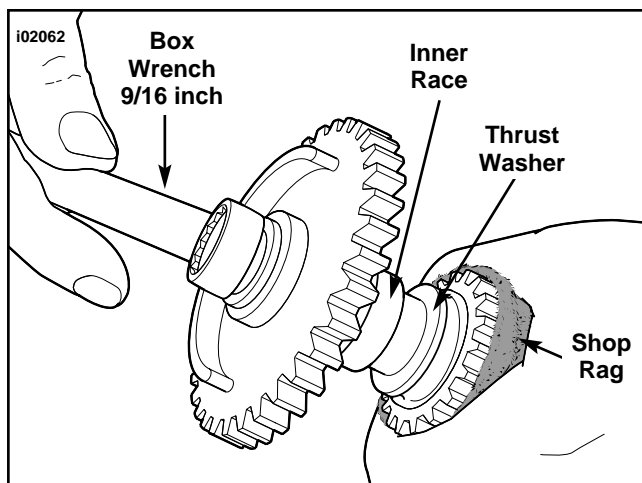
Install Bearing Inner Race (with O-Ring and Washer)
